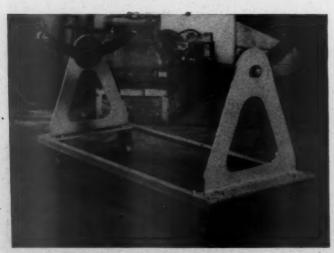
Positioner for complete Waukesha engine-compressor or engine-generator units
